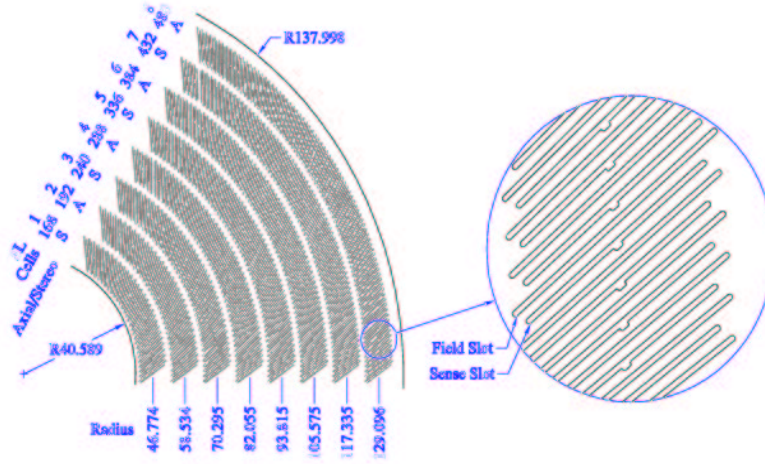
A section of the COT endplate, showing the cell counts in superlayers 1-8. The radii at the center of each superlayer are shown in cm. The endplate has inner and outer radii of 40.589 cm and 137.998 cm.
